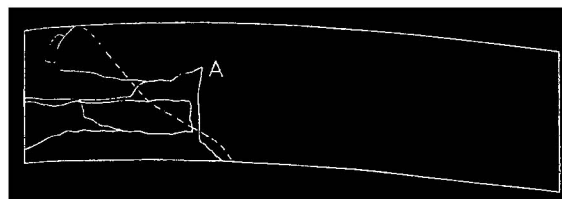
FULL-SIZE SKETCHES SHOWING FRACTURES (Professor Kennedy).
